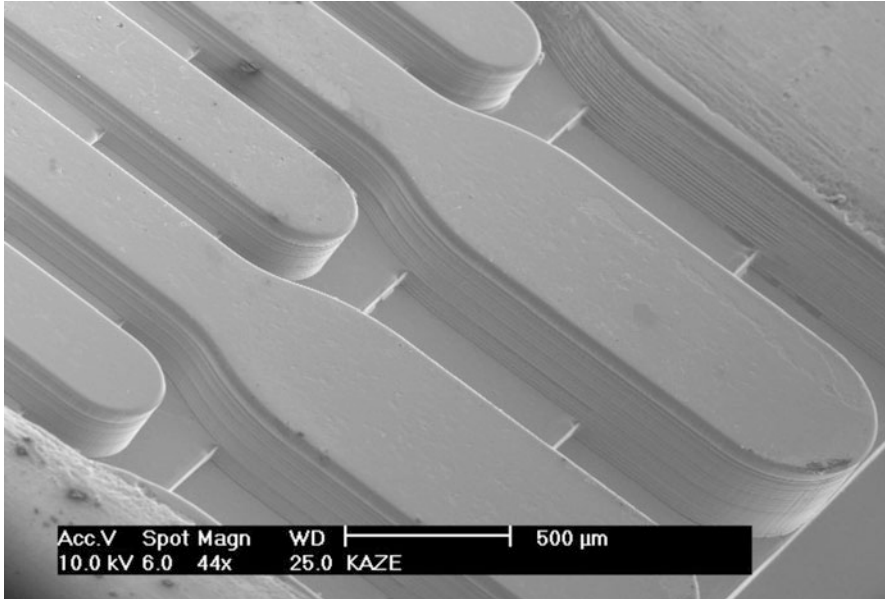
Multilevel microfluidic structure injection molded from a mechanically machined mold insert
